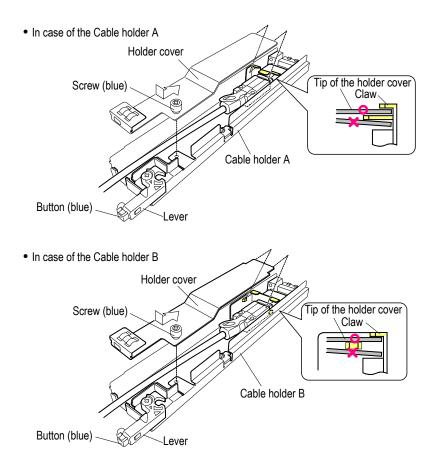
Attaching the Cable Holder and the Holder Cover
